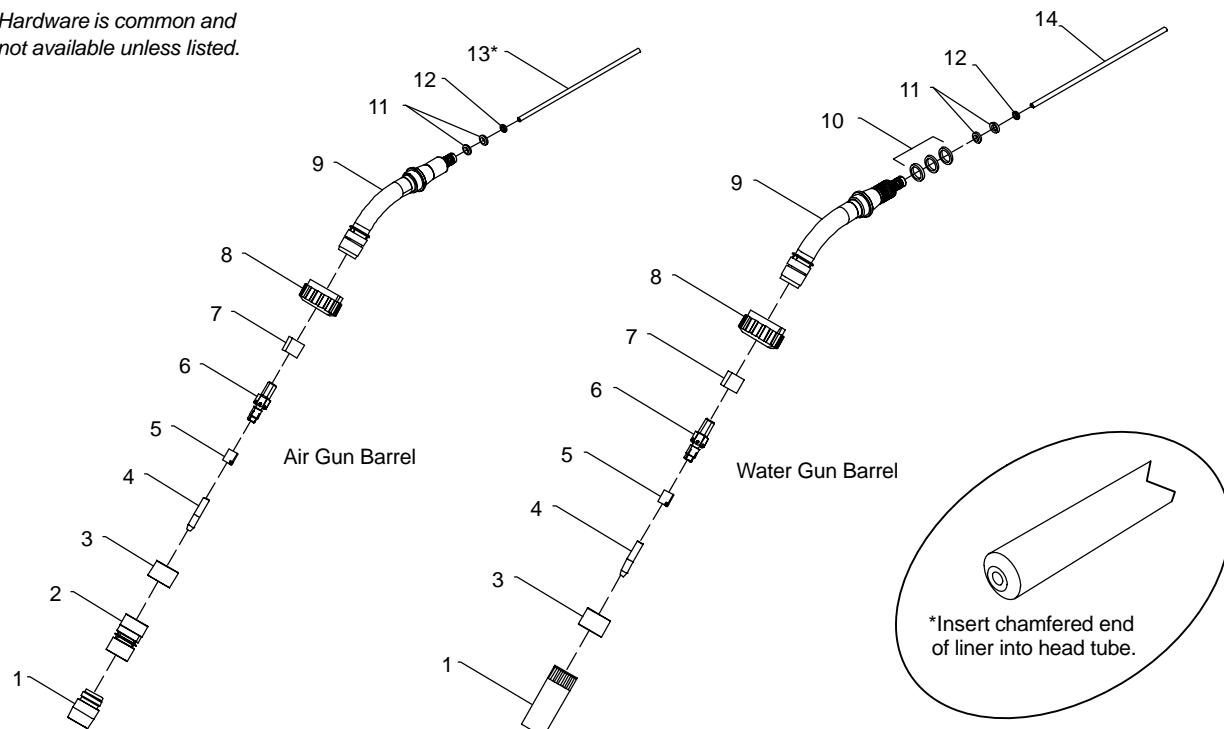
Exploded View Of XR-Edge Gun (Continued)
